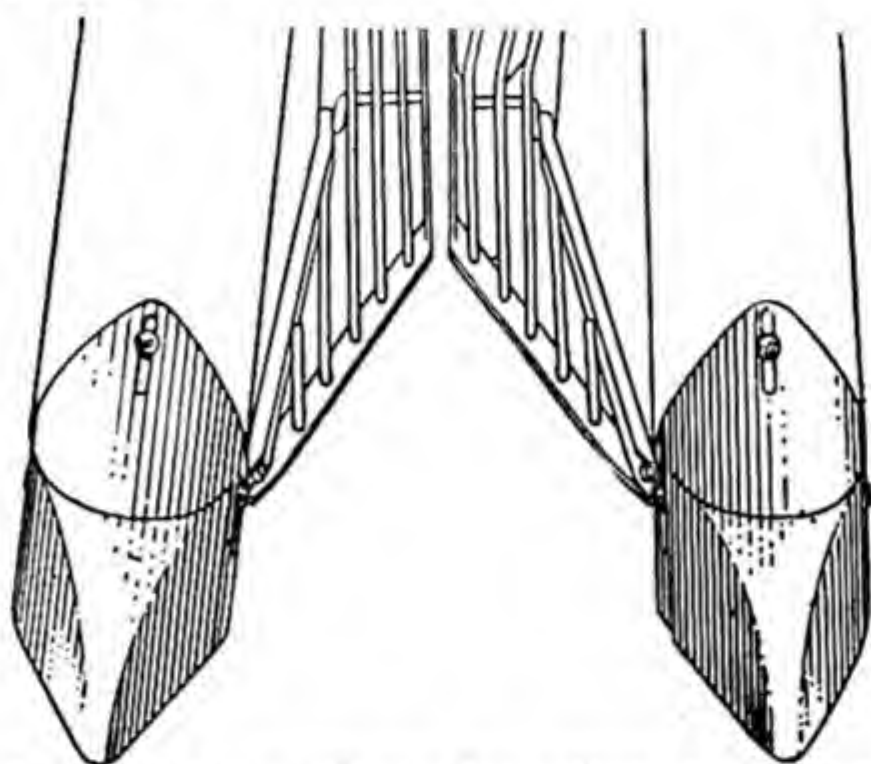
Limb-lifting fingers for cotton-stripping machines.
